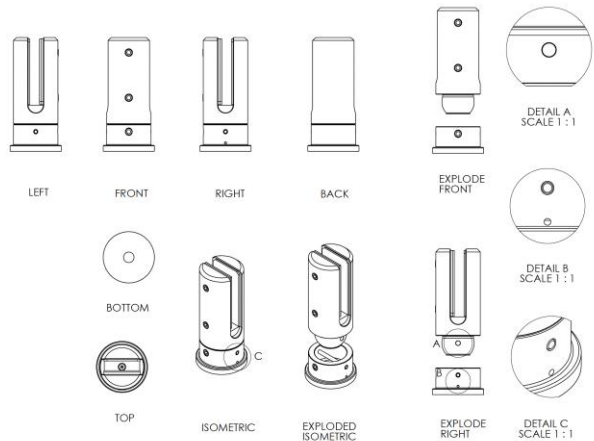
THREE-DIMENSIONAL VIEW WITH DEVICE
